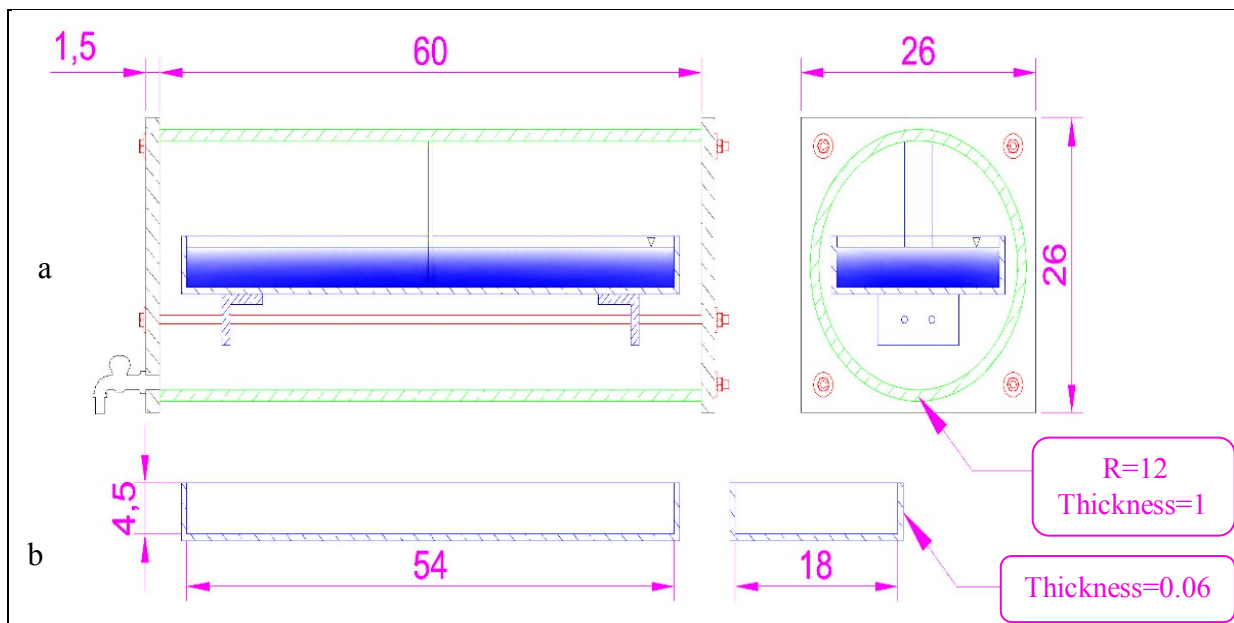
(a) Dimensions of cover, (b) Dimensions of trough. All dimensions in cm
